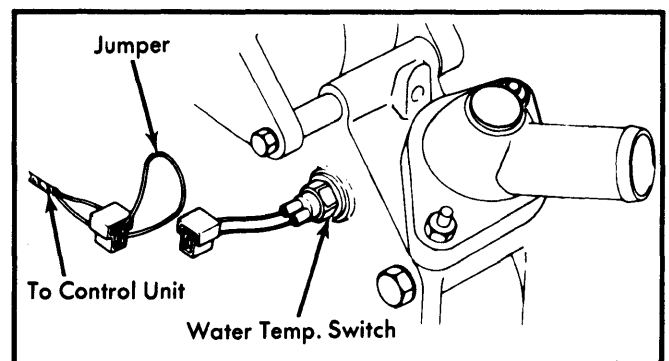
Detaching No. 1 Water Temperature Switch Wiring and Attaching Jumper to Coupler
